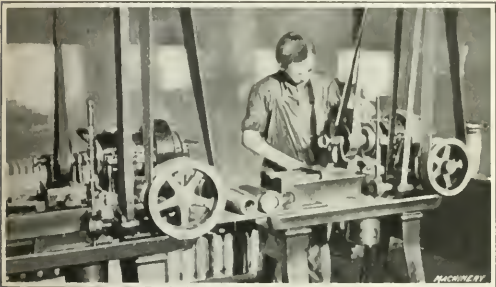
Threading Nose and Base Ends of Shell in Holden-Morgan Special Thread Milling Machines
